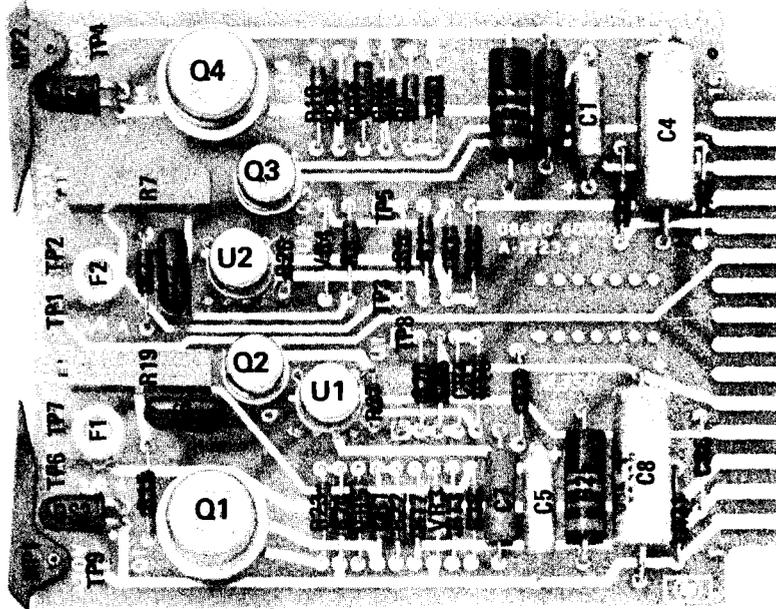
A22 +20V and -20V Regulator Assembly Component Locations Backdating (Change 1)
